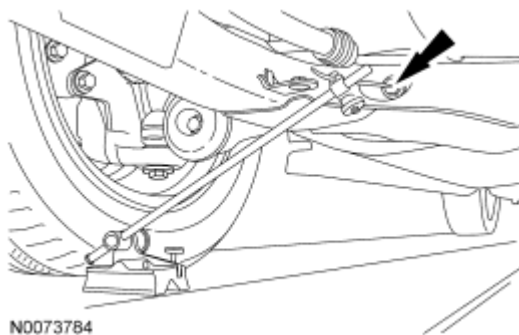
Adjusting Gauge's Arm Until Scriber Point Is Located In Center Of Front Lower Arm-To-Subframe Bolt
